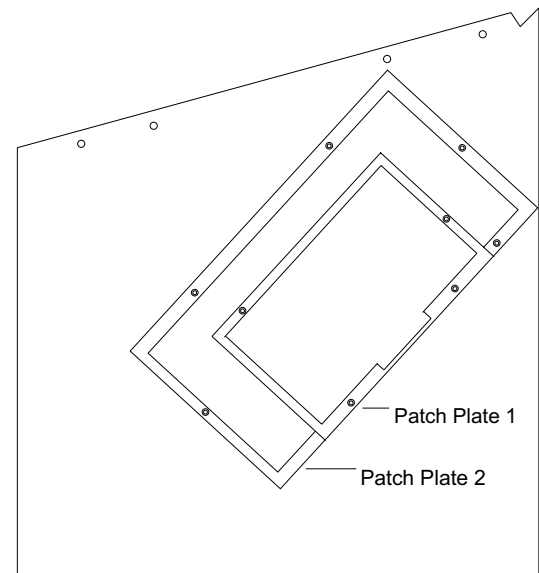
PATCH PANEL PLATE 1 & 2
